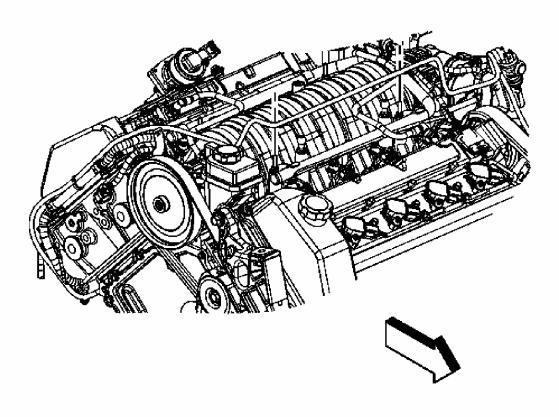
Locating Coolant Heater Cord Tabs Courtesy of GENERAL MOTORS CORP.
